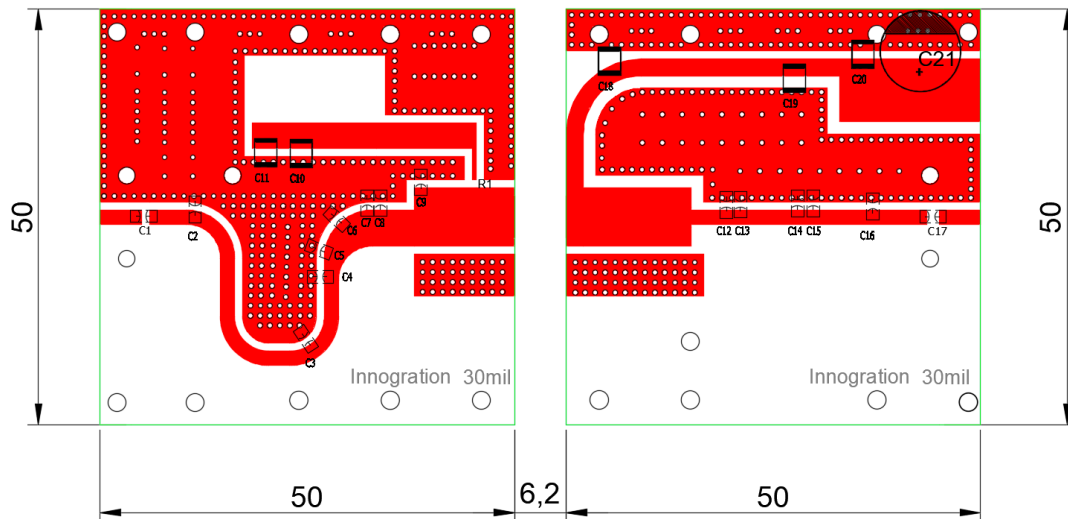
Test Circuit Component Layout (350-400MHz) RO4350B 30mils
